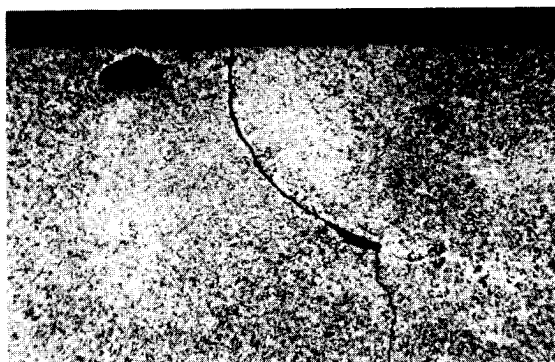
Macrograph of section through defective zone of cockpit canopy casting.
